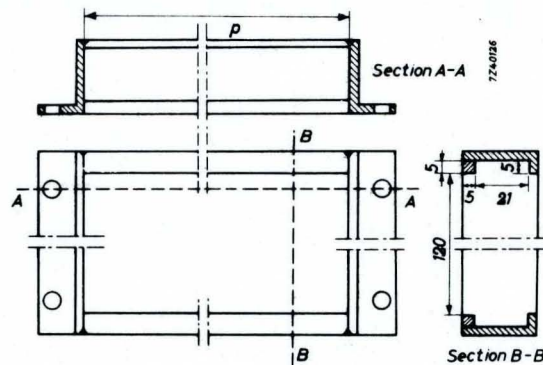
Dimensional drawing of the frame in Fig.85. The dimension p depends on the number of contact blocks.
